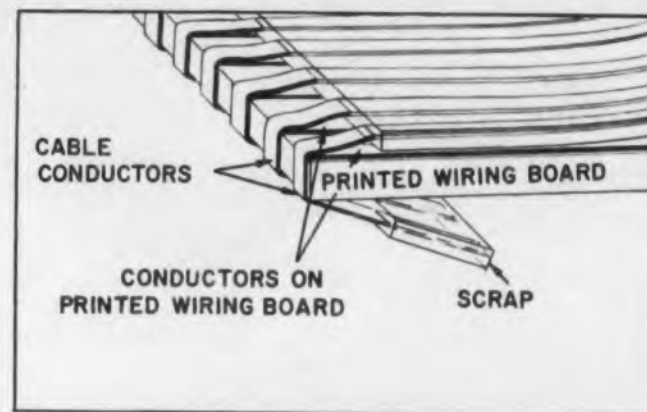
Intermediate stripping is useful when the cables are attached to a printed wiring board.
